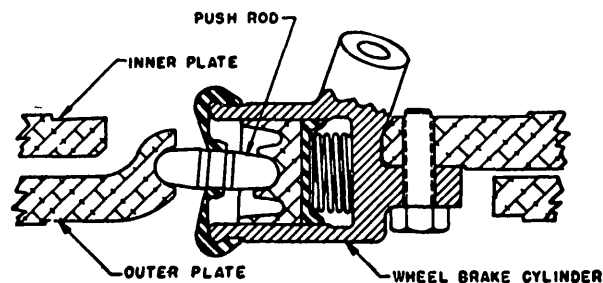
Cross section of wheel brake cylinder. Chrysler disc brake
